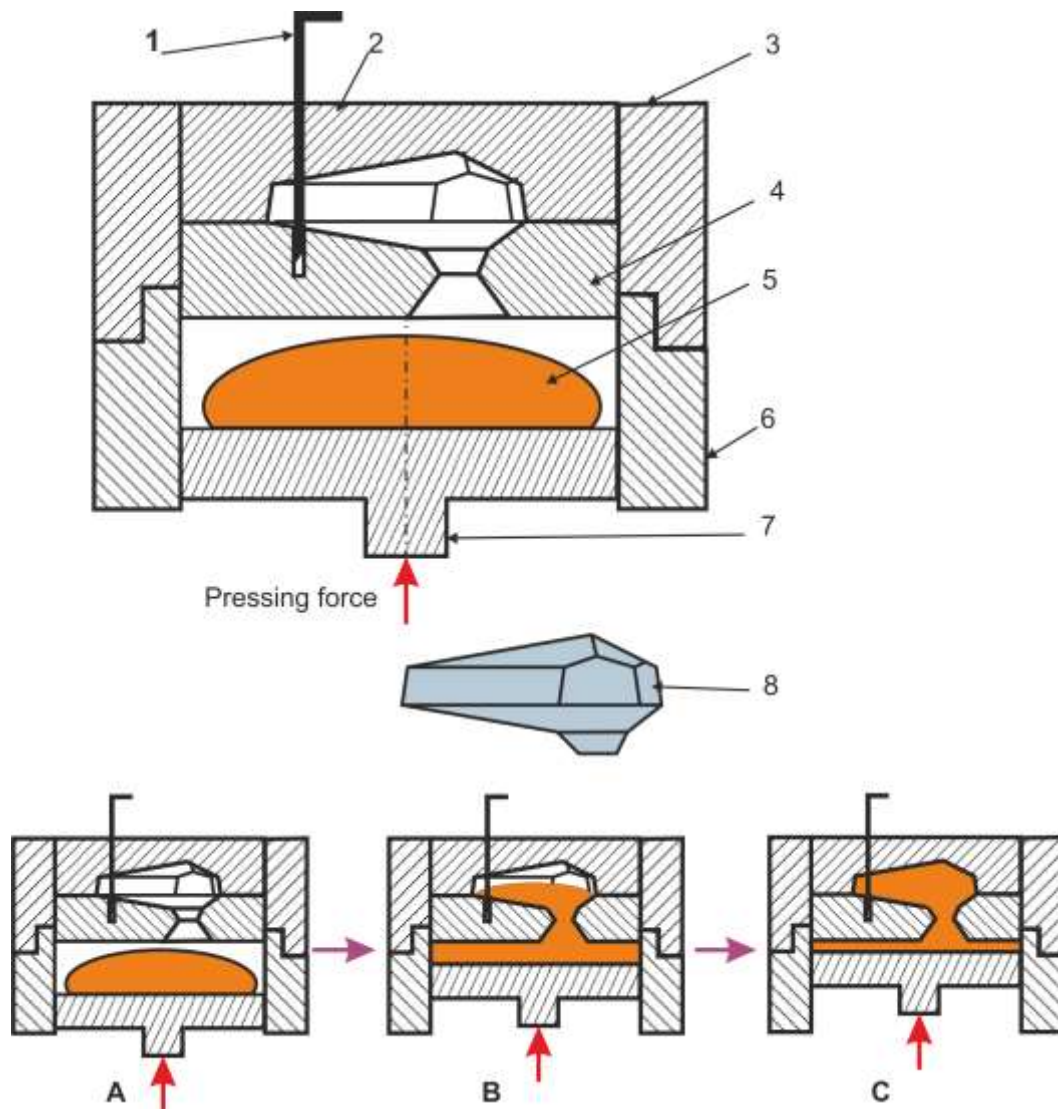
Injection pressing technology on the G 12 machine: 1 - punching needle, 2 - upper mould, 3 - frame of the mould assembly, 4 - lower mould, 5 - gob of glass melt, 6 - feeding mould, 7 - pressing station table (pressing piston), 8 - finished pressed object, A - closed mould, B - pressing process (filling in the mould), C - end of pressing
